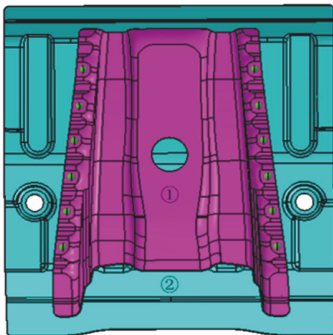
Assembly part: ① Middle channel; ② Floor panel
